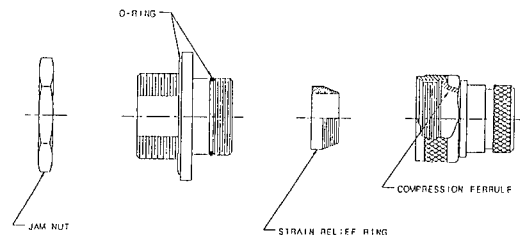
Expanded View of the Fiber Optic Feed Through Adapter Design No. 1 (Drawing Courtesy of Glenair, Inc.)
